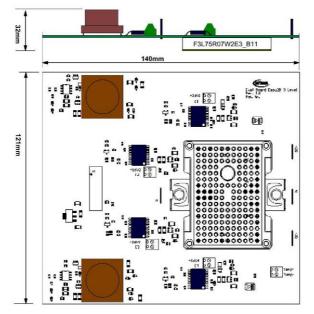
Mechanical dimensions of the F3L030E07-F-W2
